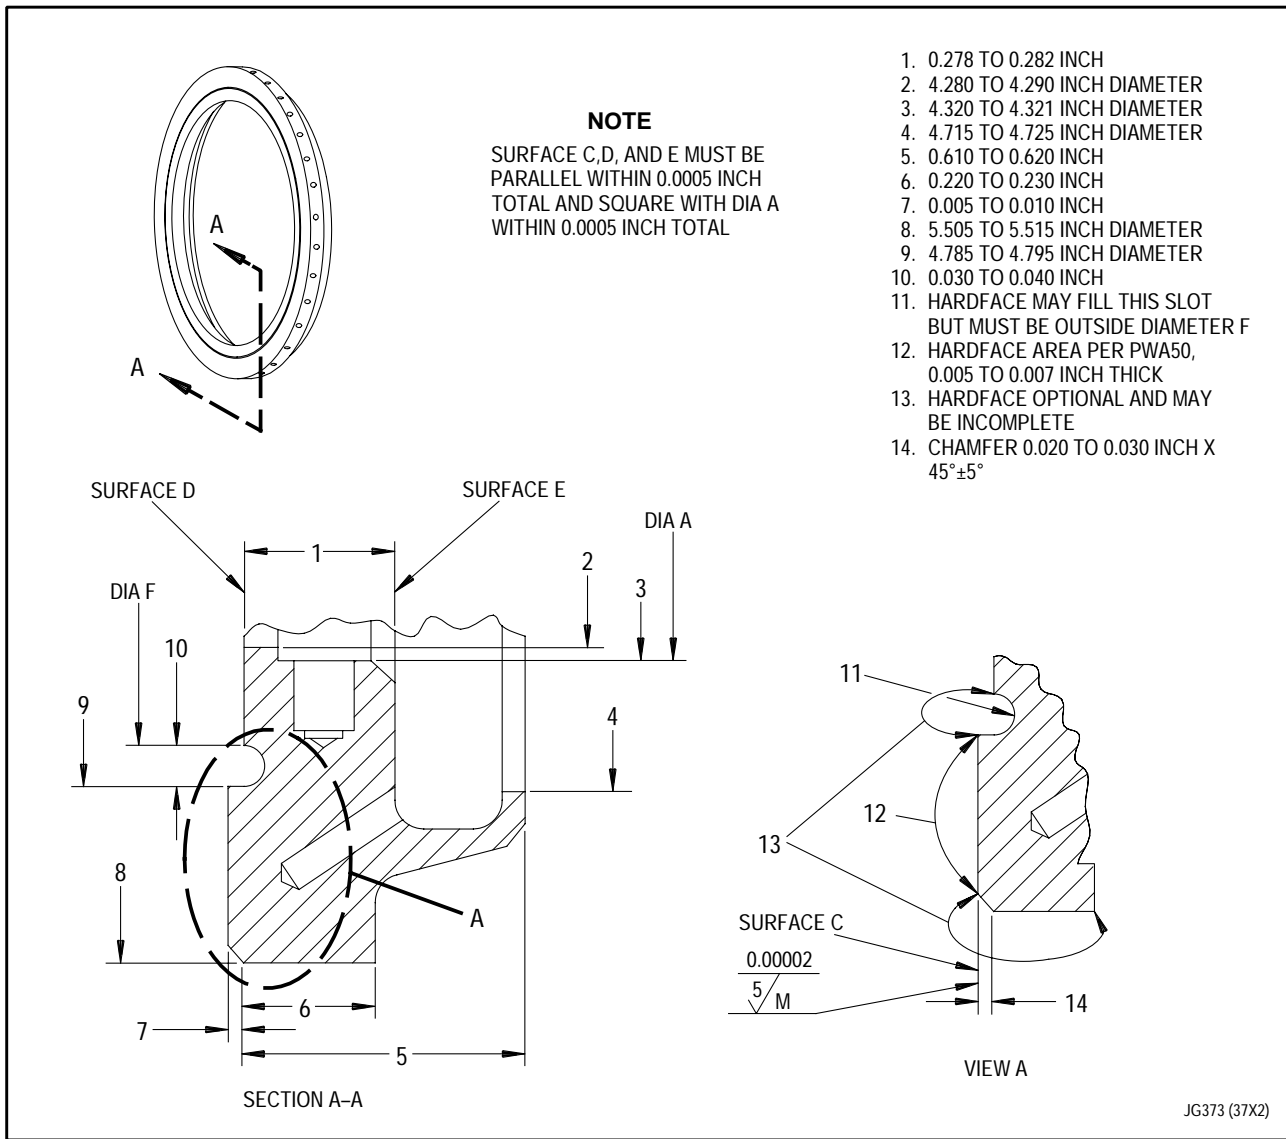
No. 3 Bearing Front Seal Seat - Flame Deposition Coating and Lapping Repair (PN 4022669)
